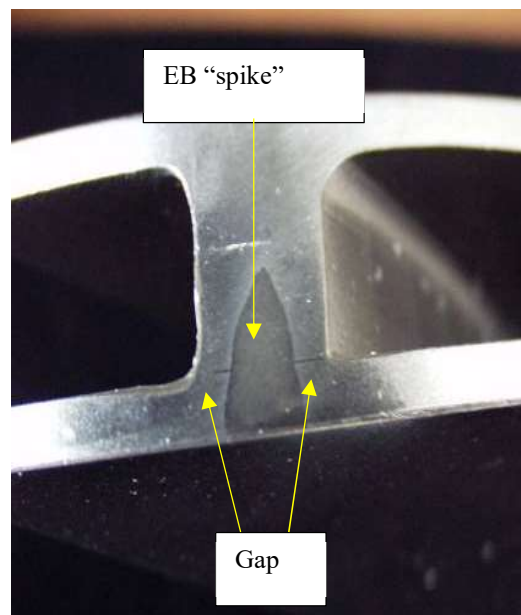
Electron-beam welding joint illustrating gap on both sides of EB joint
